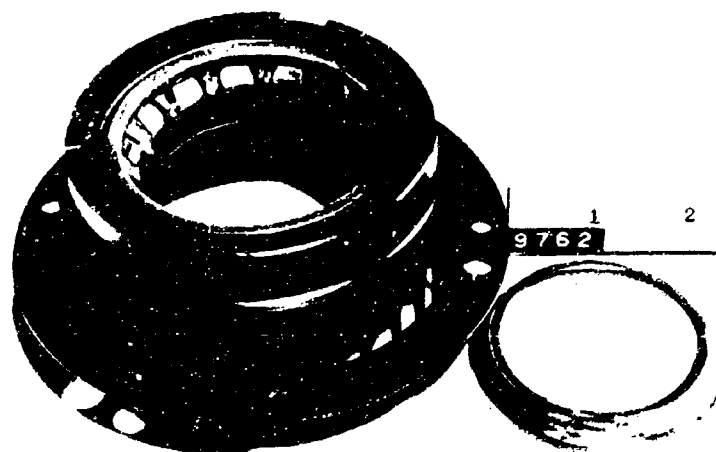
Mainshaft Bearing Failure Caused by Loss of lubrication.
